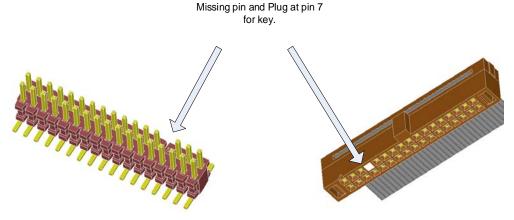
Basic Debug PCB (left) and Cable End Connector (34-pin Samtec FTSH)
